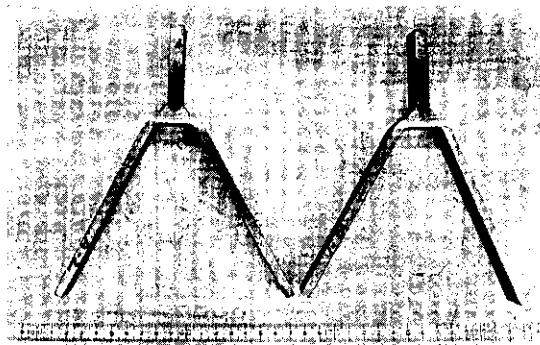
Appearance of T-shaped fillet joints after bend test (web: 8 mm thick SCW49, flange: 6.4 mm thick R410DH, welding material: Y-308)
